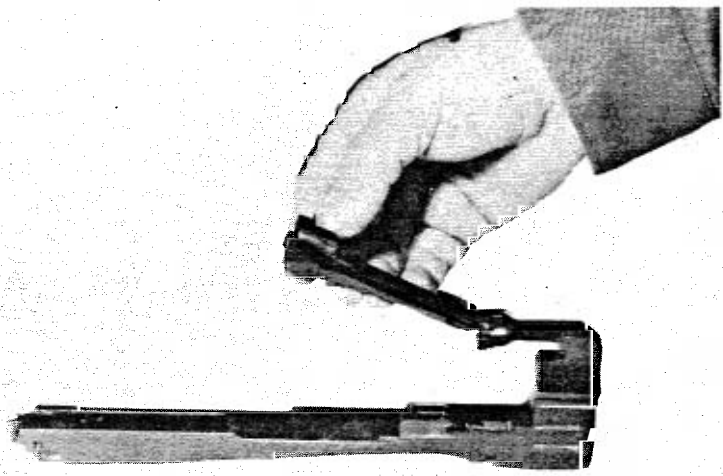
INSERTING BOLT INTO CARRIER BLOCK
